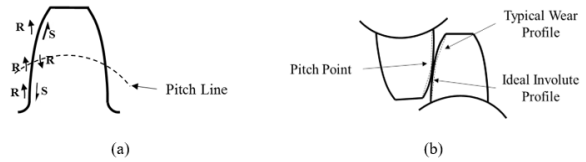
(a) Gear tooth rolling and sliding contact[93,114], (b) wear profile along the gear flank[115]
